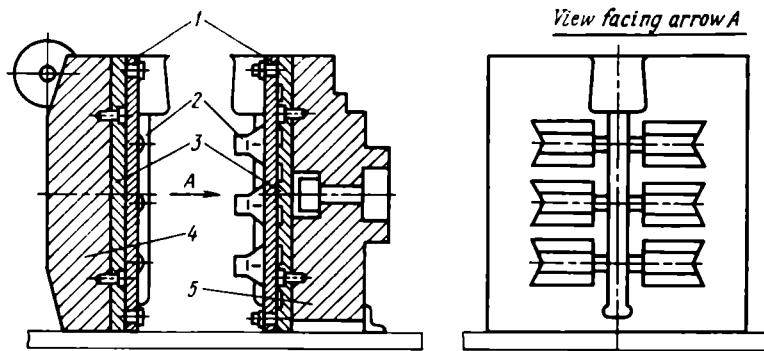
Pattern plates for an automatic flaskless molding machine producing vertically split molds
